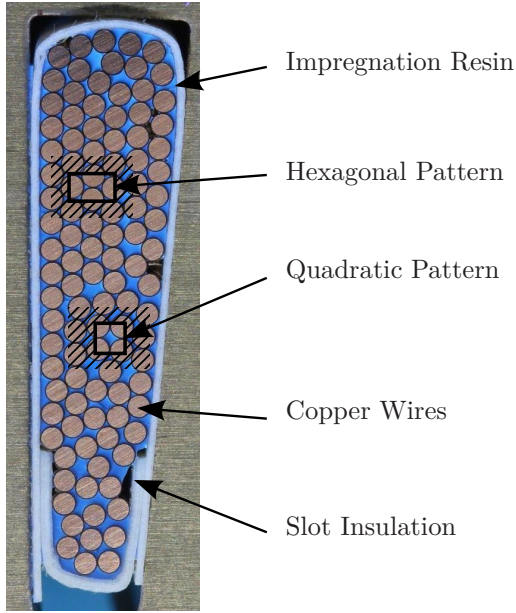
Exemplary cross-section of copper windings that contains both characteristic wire packing patterns, the hexagonal and quadratic.
